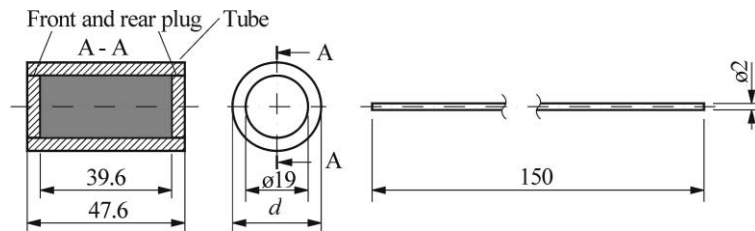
Targets and projectile for reverse impact tests. Dimensions in mm ( $d = 21, 23$  and  $27$  mm).
